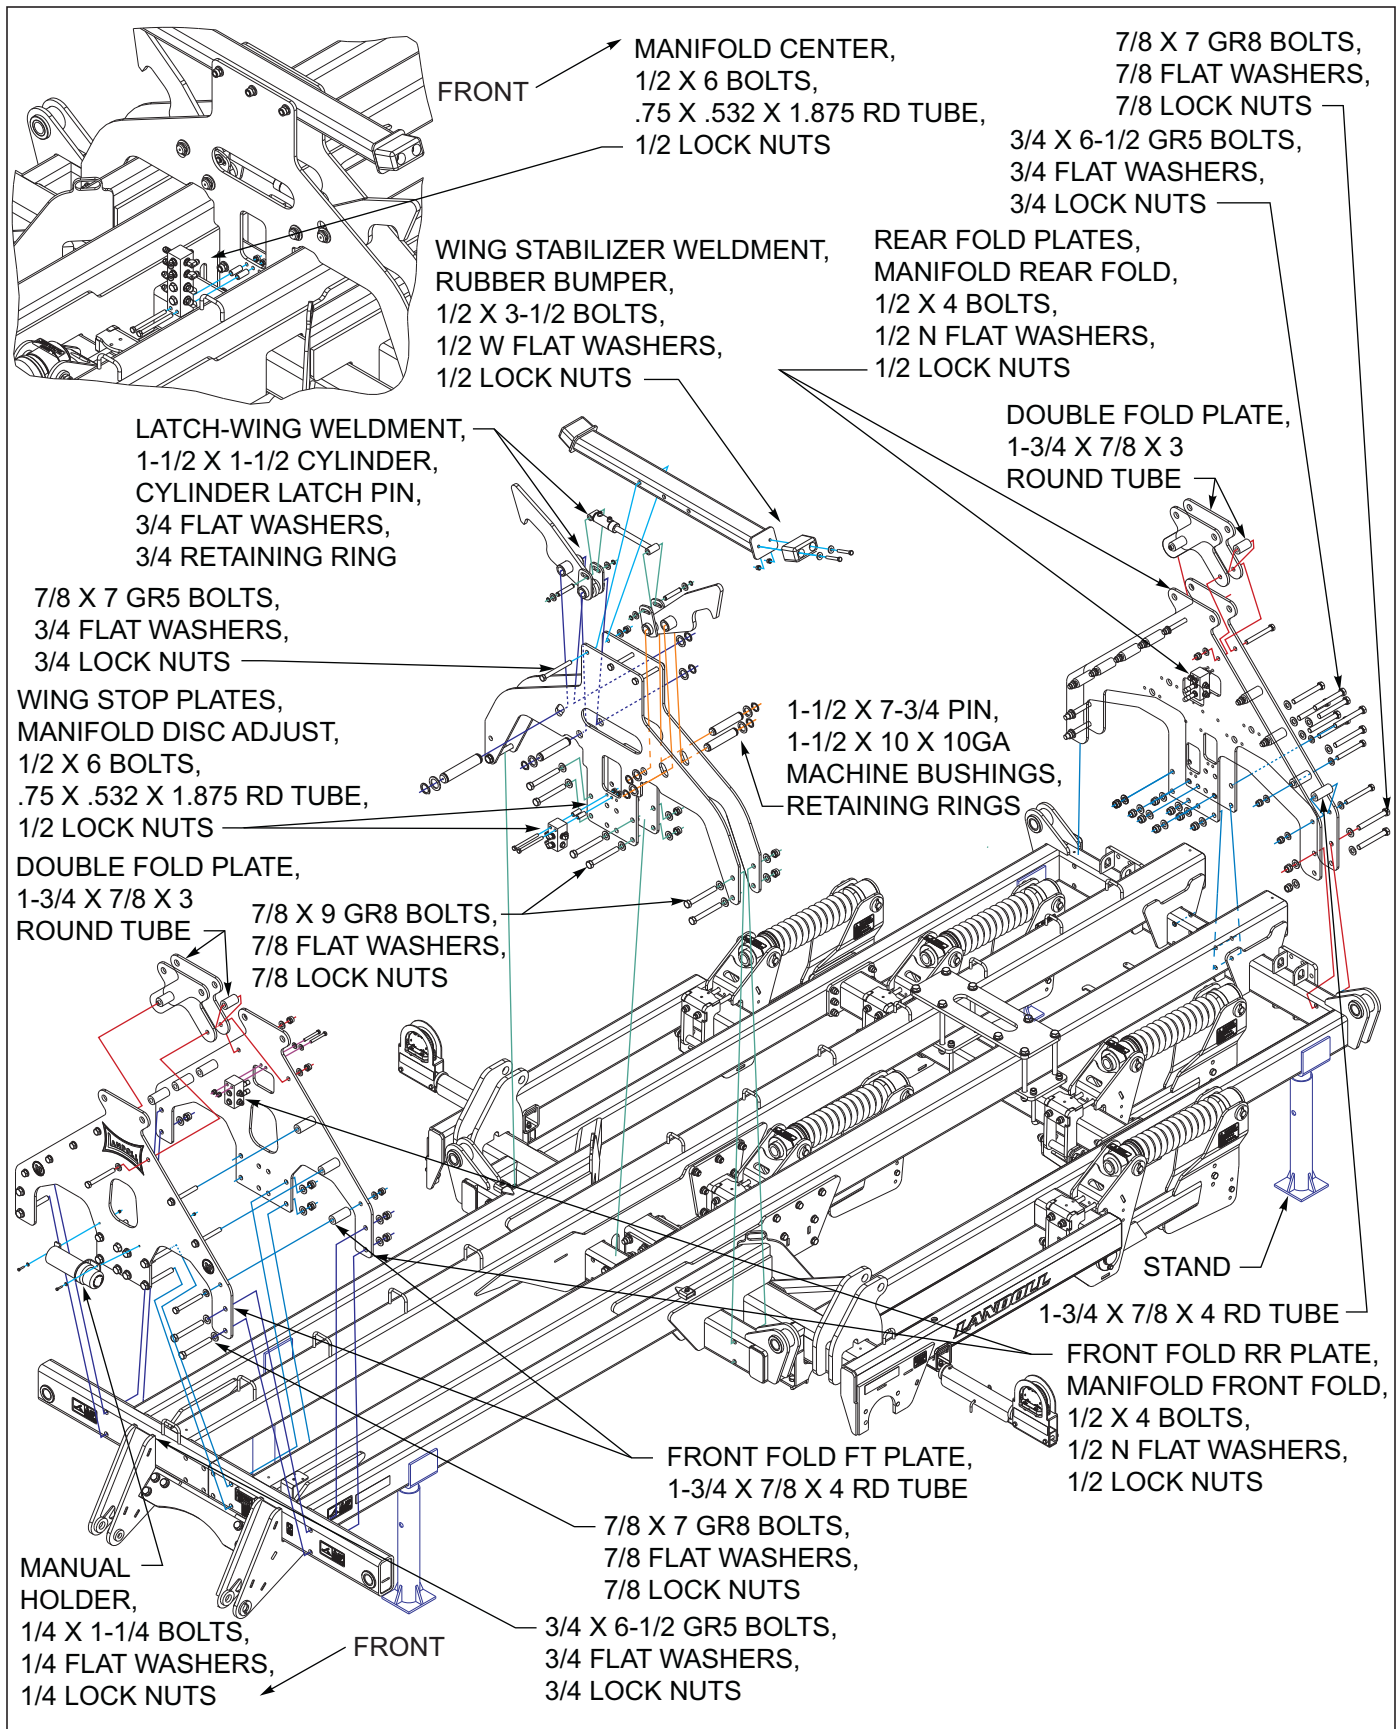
Center Frame Fold Assembly 2411AFG-07-09 After 08/01/2022
